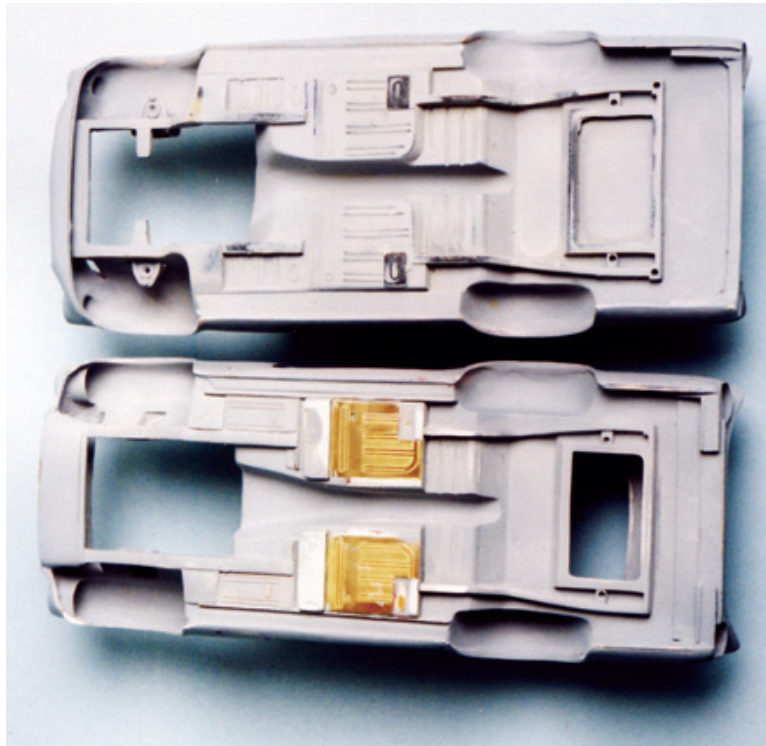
Note the structural detail underneath the cab of the *Dream Truck*<sup>2</sup>; this comes from a photoetch sheet created by Bob Wick and Fotocut (Fred Hultberg). The gas tank will be dropped in place between the rear frame rails through the top of the bed (before the double-hinged bed cover is installed) because the body design won't permit the gas tank to bolt in place from underneath. This is one of the issues to be considered when building your model: How are you going to assemble it? Develop and write down an “assembly manual” to guide the final construction of your scale miniature!
